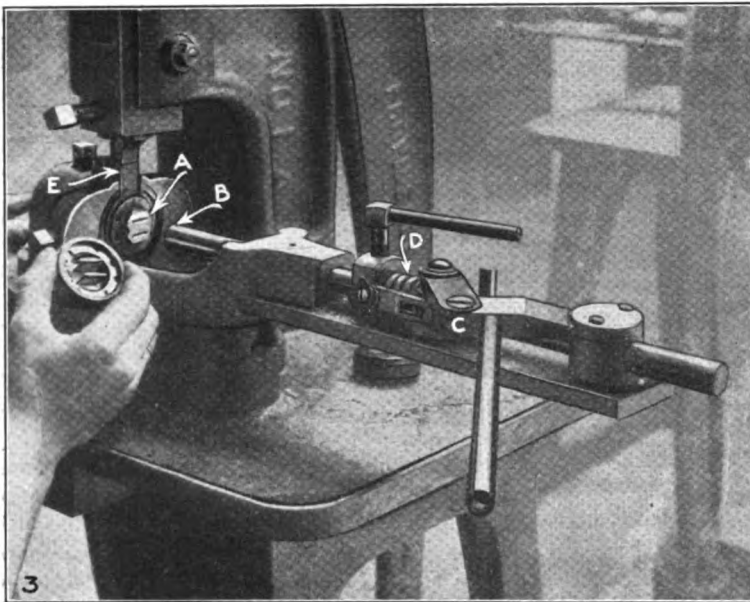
TRIMMING ENDS OF POLE PIECES. FIG. 4—MAGNETIZING THE MAGNET
